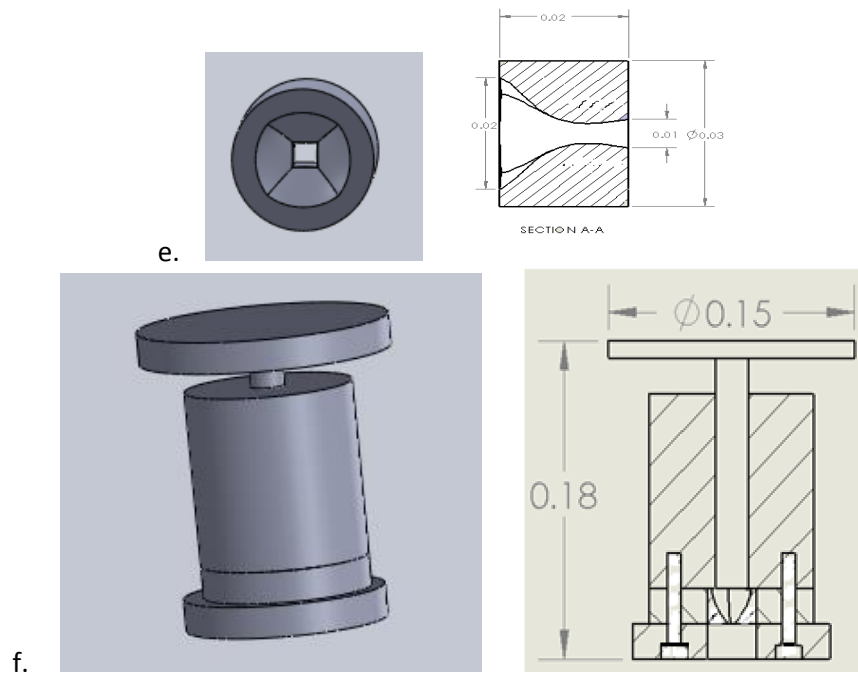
11 e) 3D and 2D section view of die and f) 3D assembly and 2D sectionsl view drawing
